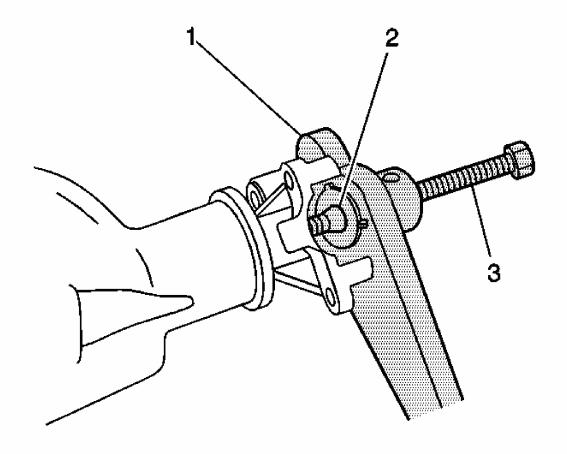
Holding Pinion Yoke With Special Tool Courtesy of GENERAL MOTORS CORP.
